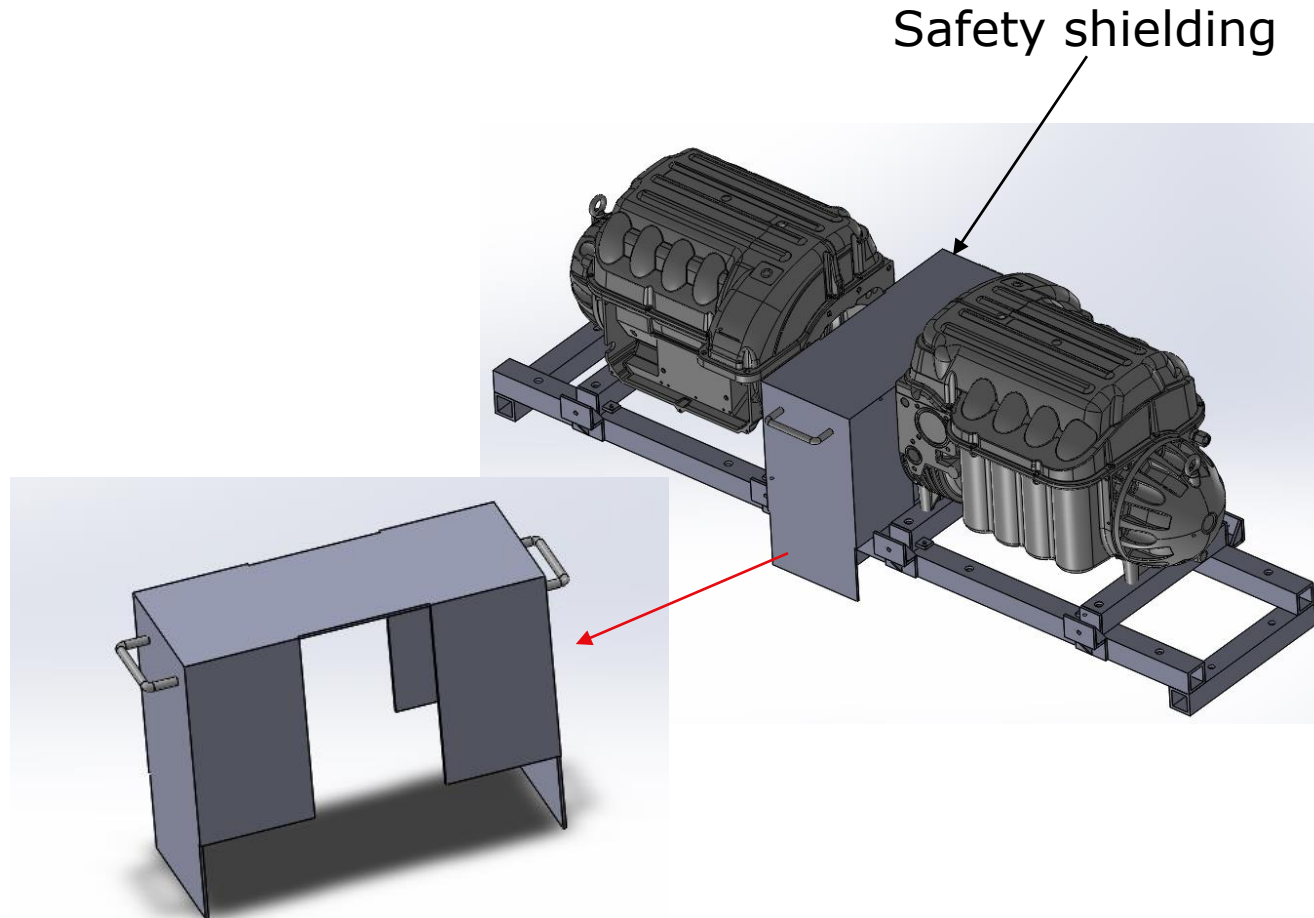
Safety shielding. Figure 35. Assembly with safety shielding.
